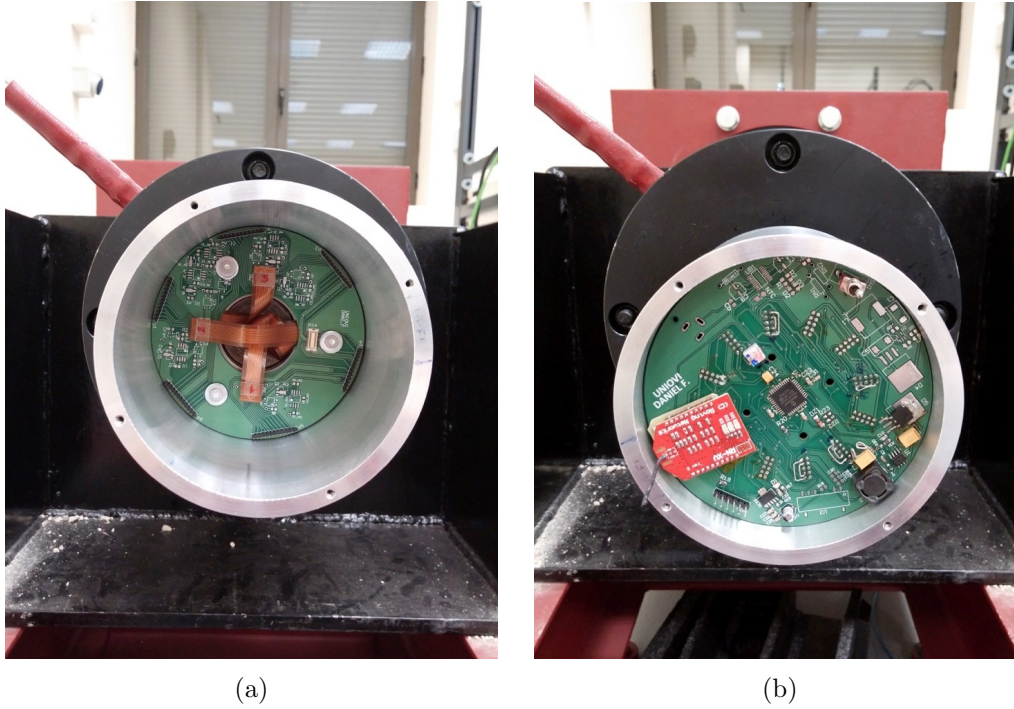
a) assembling of the connection PCB; b), aluminum box containing master  $\mu$ Controller PCB, Slave  $\mu$ Controllers PCBs, filtering and conditioning PCBs and WiFi module.
